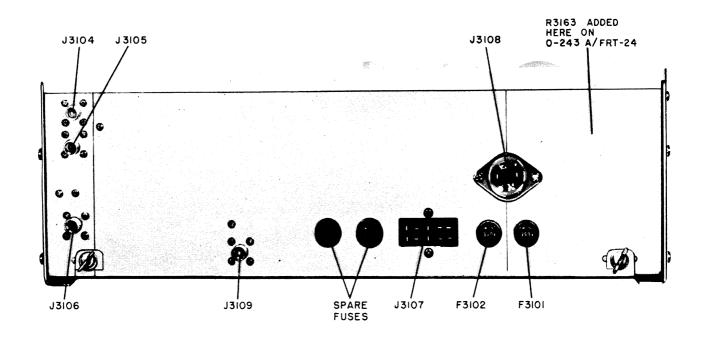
R-F Oscillator, O-243/FRT-24, Rear View, Location of Parts
